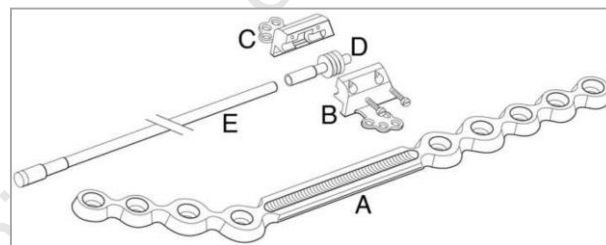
Exploded view of device proposed by Elsalanty. (Elsalanty, et al., 2009)
